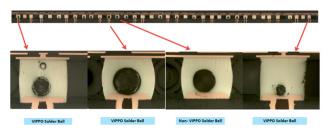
Solder Voiding with Solder Joint Encapsulant Material A on Fine Pitch TV Control
